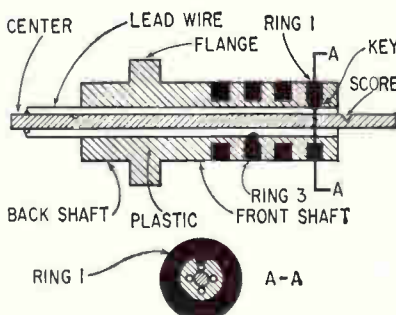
Cross sections of typical miniature cylindrical slip ring assembly
